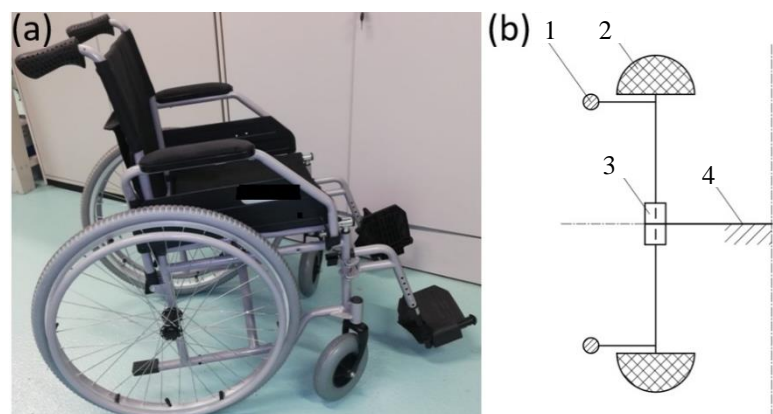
Classic push-rim manual wheelchair (A): a – physical model; b – kinematic diagram of a single-wheel drive system; 1 – push-rim; 2 – tire; 3 – radial ball bearing; 4 – wheelchair frame
